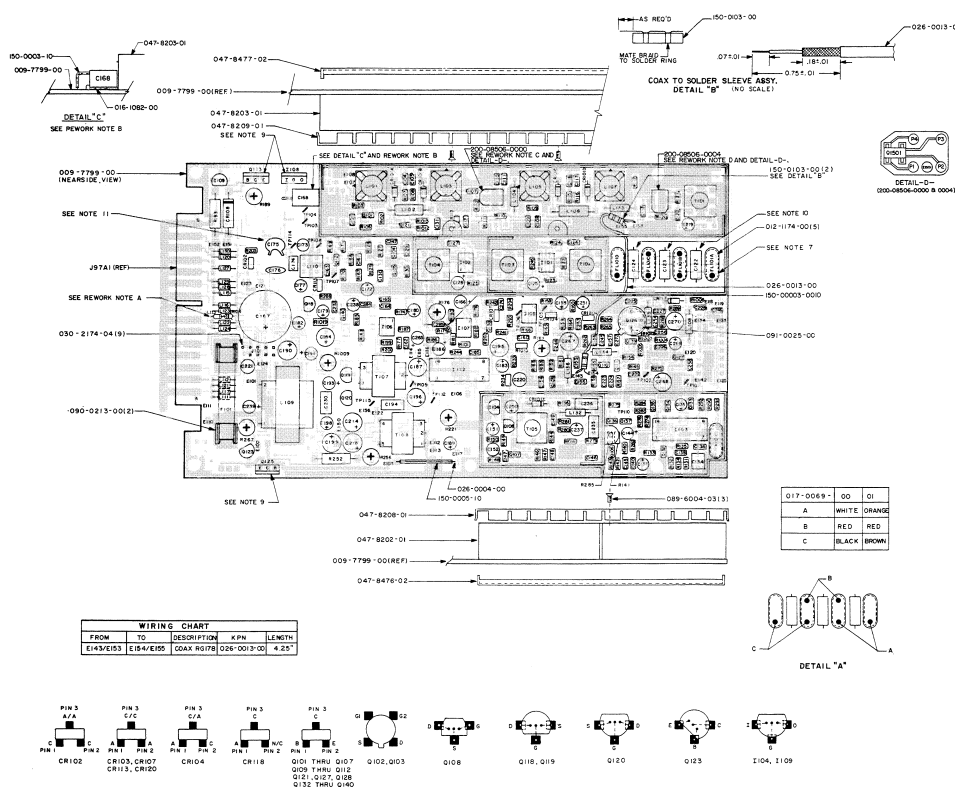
KY 97A (14V) Main Board Assembly (Sht 1 of 2)
